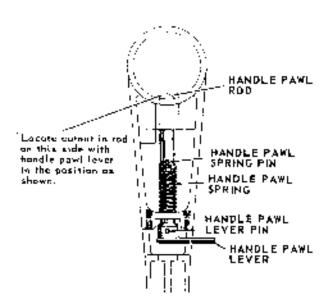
, LEVER AND ROD ASSEMBLY
